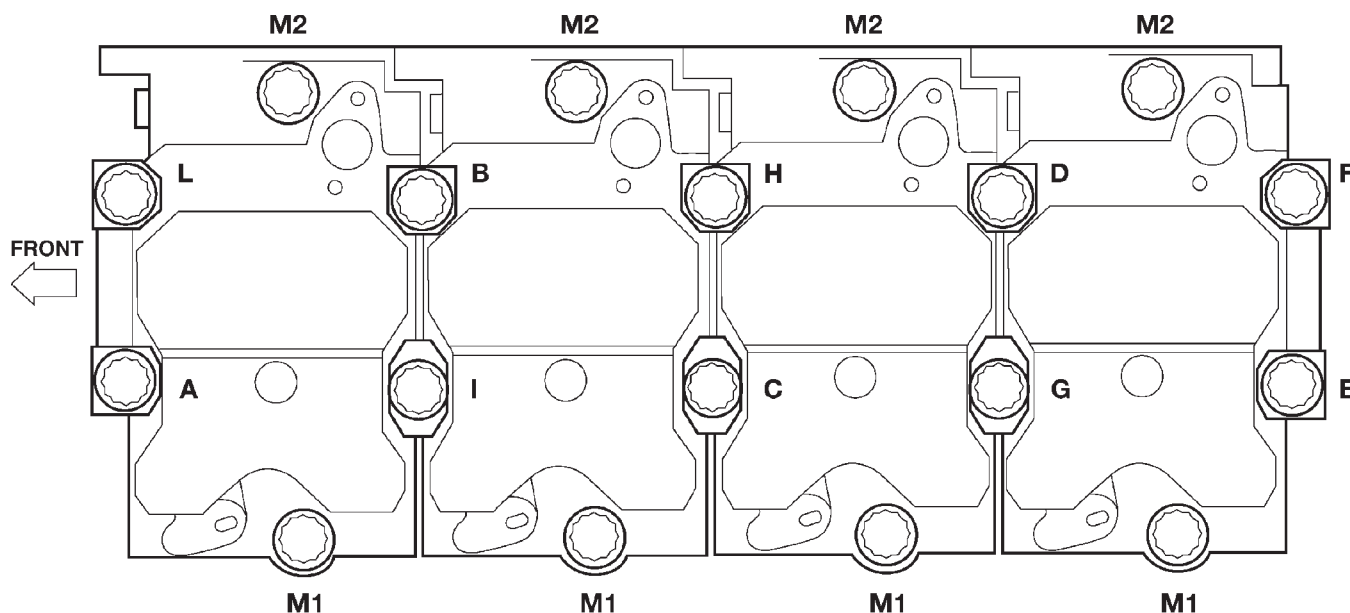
Engine Cylinder Head Bolt Tightening Sequence
